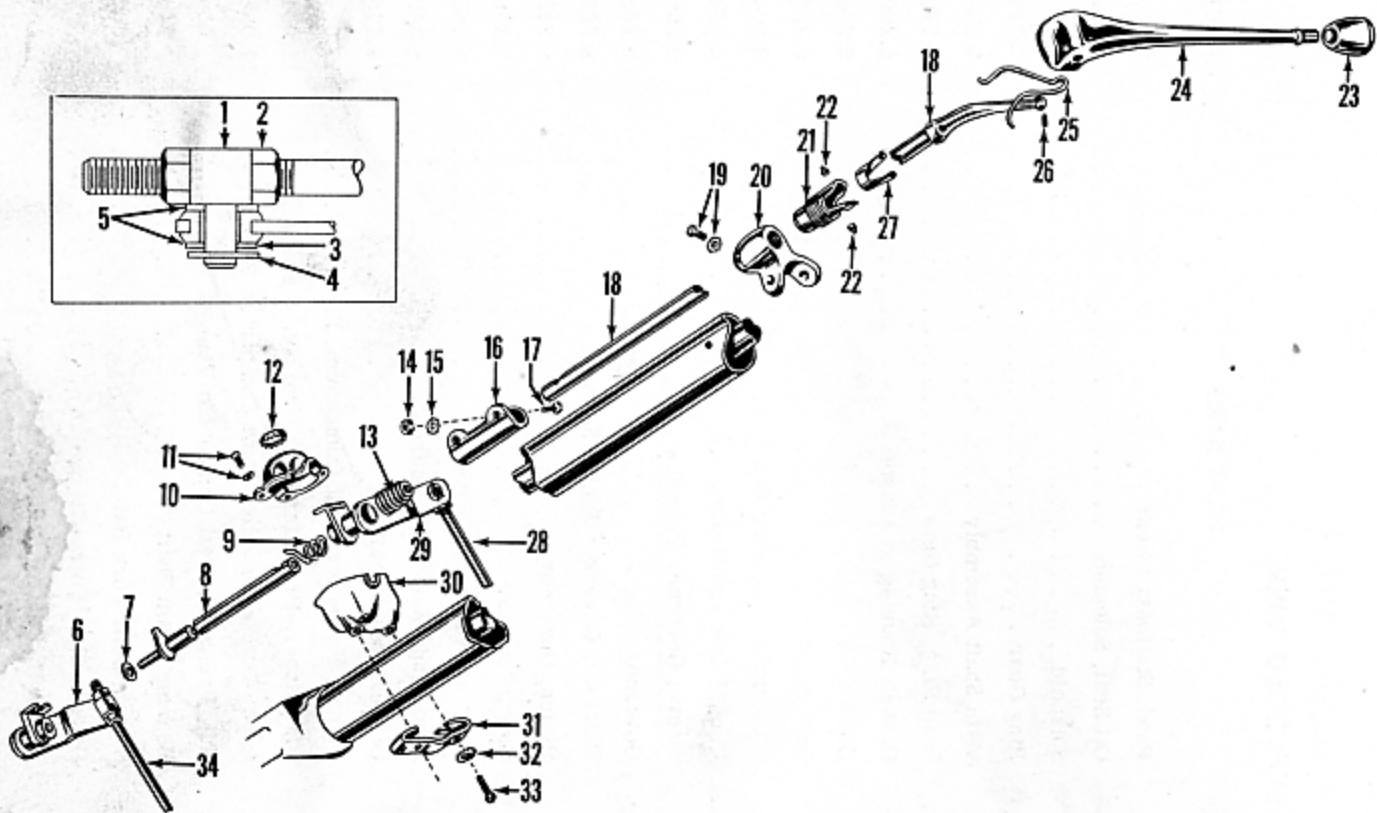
TRANSMISSION GEAR SHIFT CONTROL—EXPLODED VIEW
